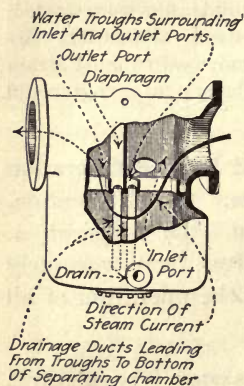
Happes Reverse-Current Horizontal Exhaust-Steam Separator.
